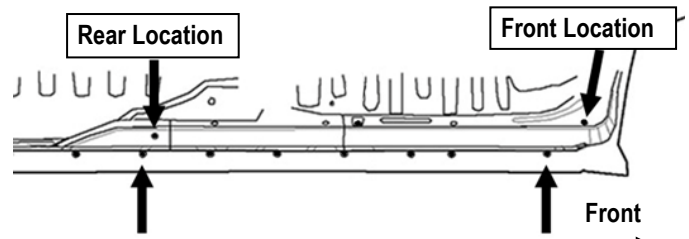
Drill Holes on Passenger Side Rear Mounting Location
